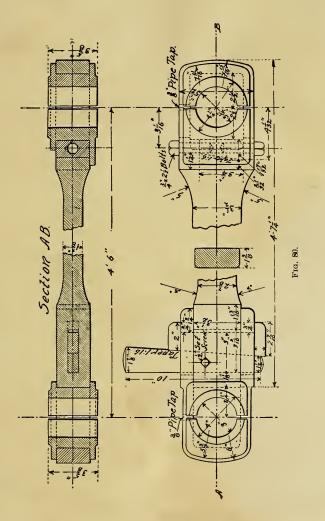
gives outside and sectional views of a connecting rod. Make special detail views of the various parts, marking all dimensions !
